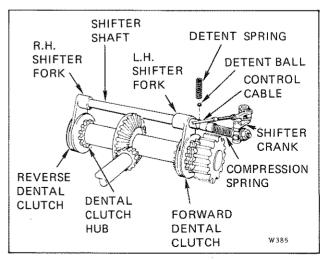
DIRECT DRIVE CLUTCH ASSEMBLY
